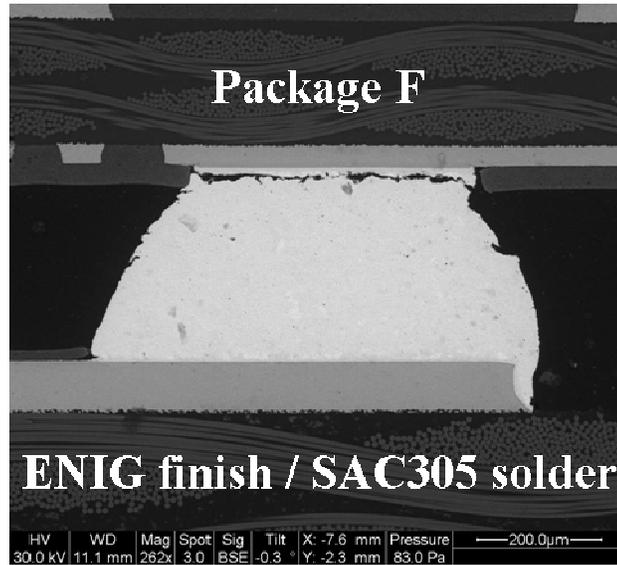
Package side crack on 256 I/O BGA [CTF=1783] (courtesy: CALCE)
